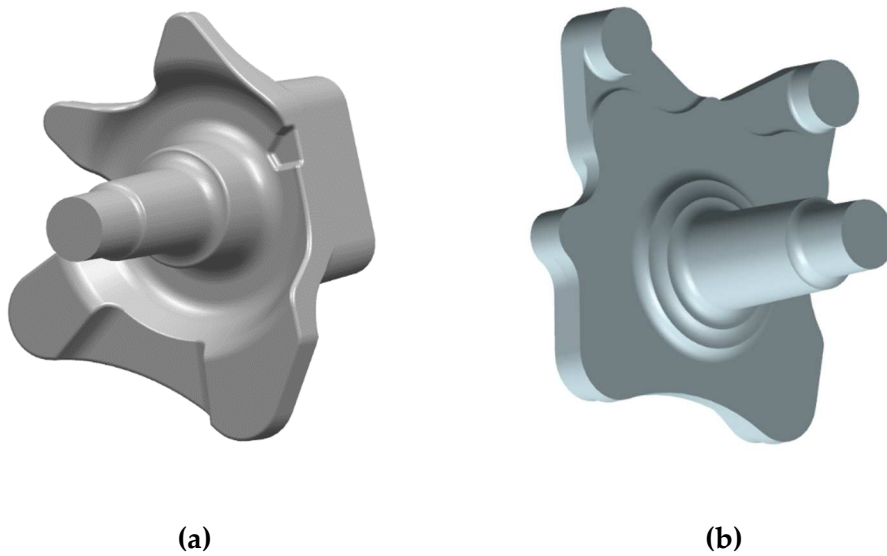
CAD drawing of the spindle geometries used in this dissertation: (a) R spindle (around 3 kg) and (b) H spindle (near 2.3 kg).
